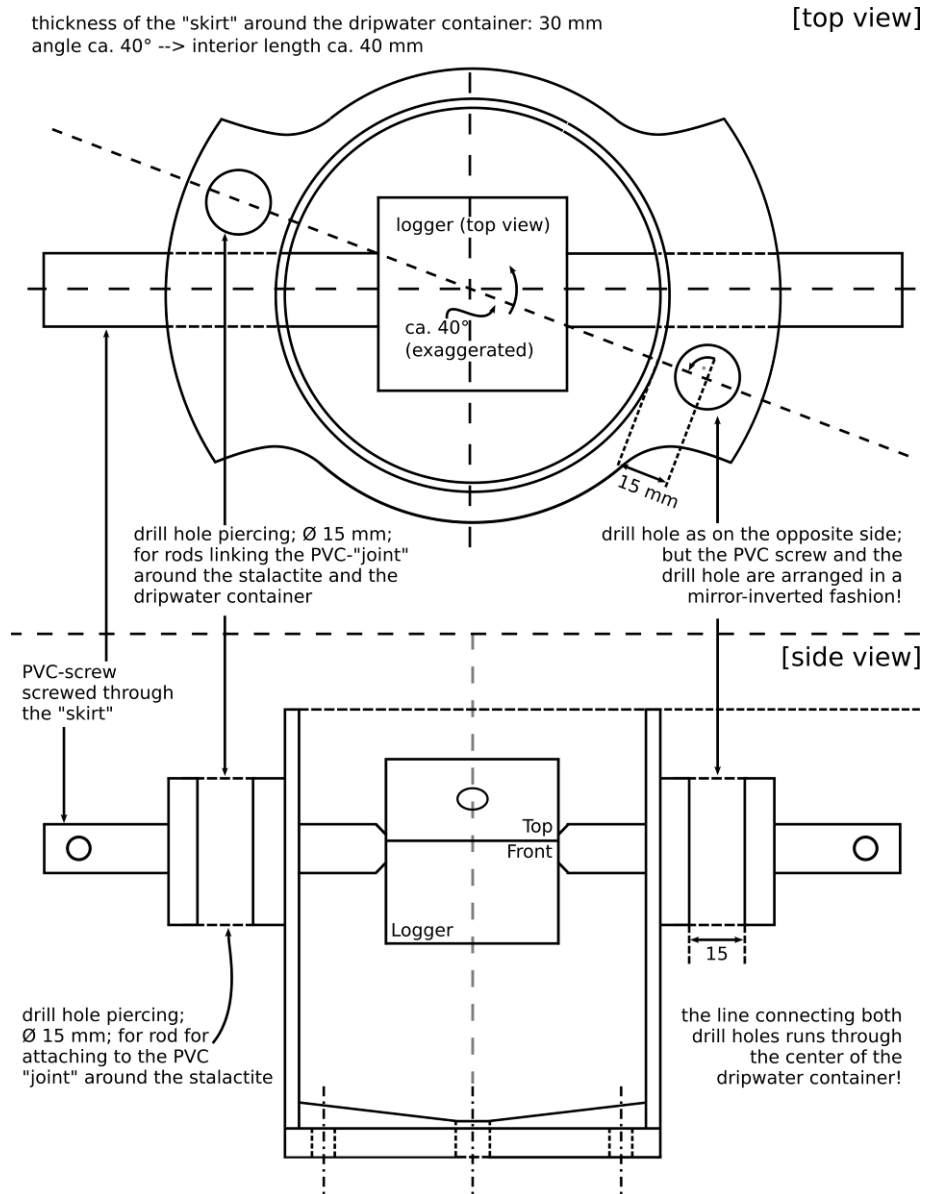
Technical drawings of the first of the two newly developed dripwater containers in top view (top) and in side view (bottom).
